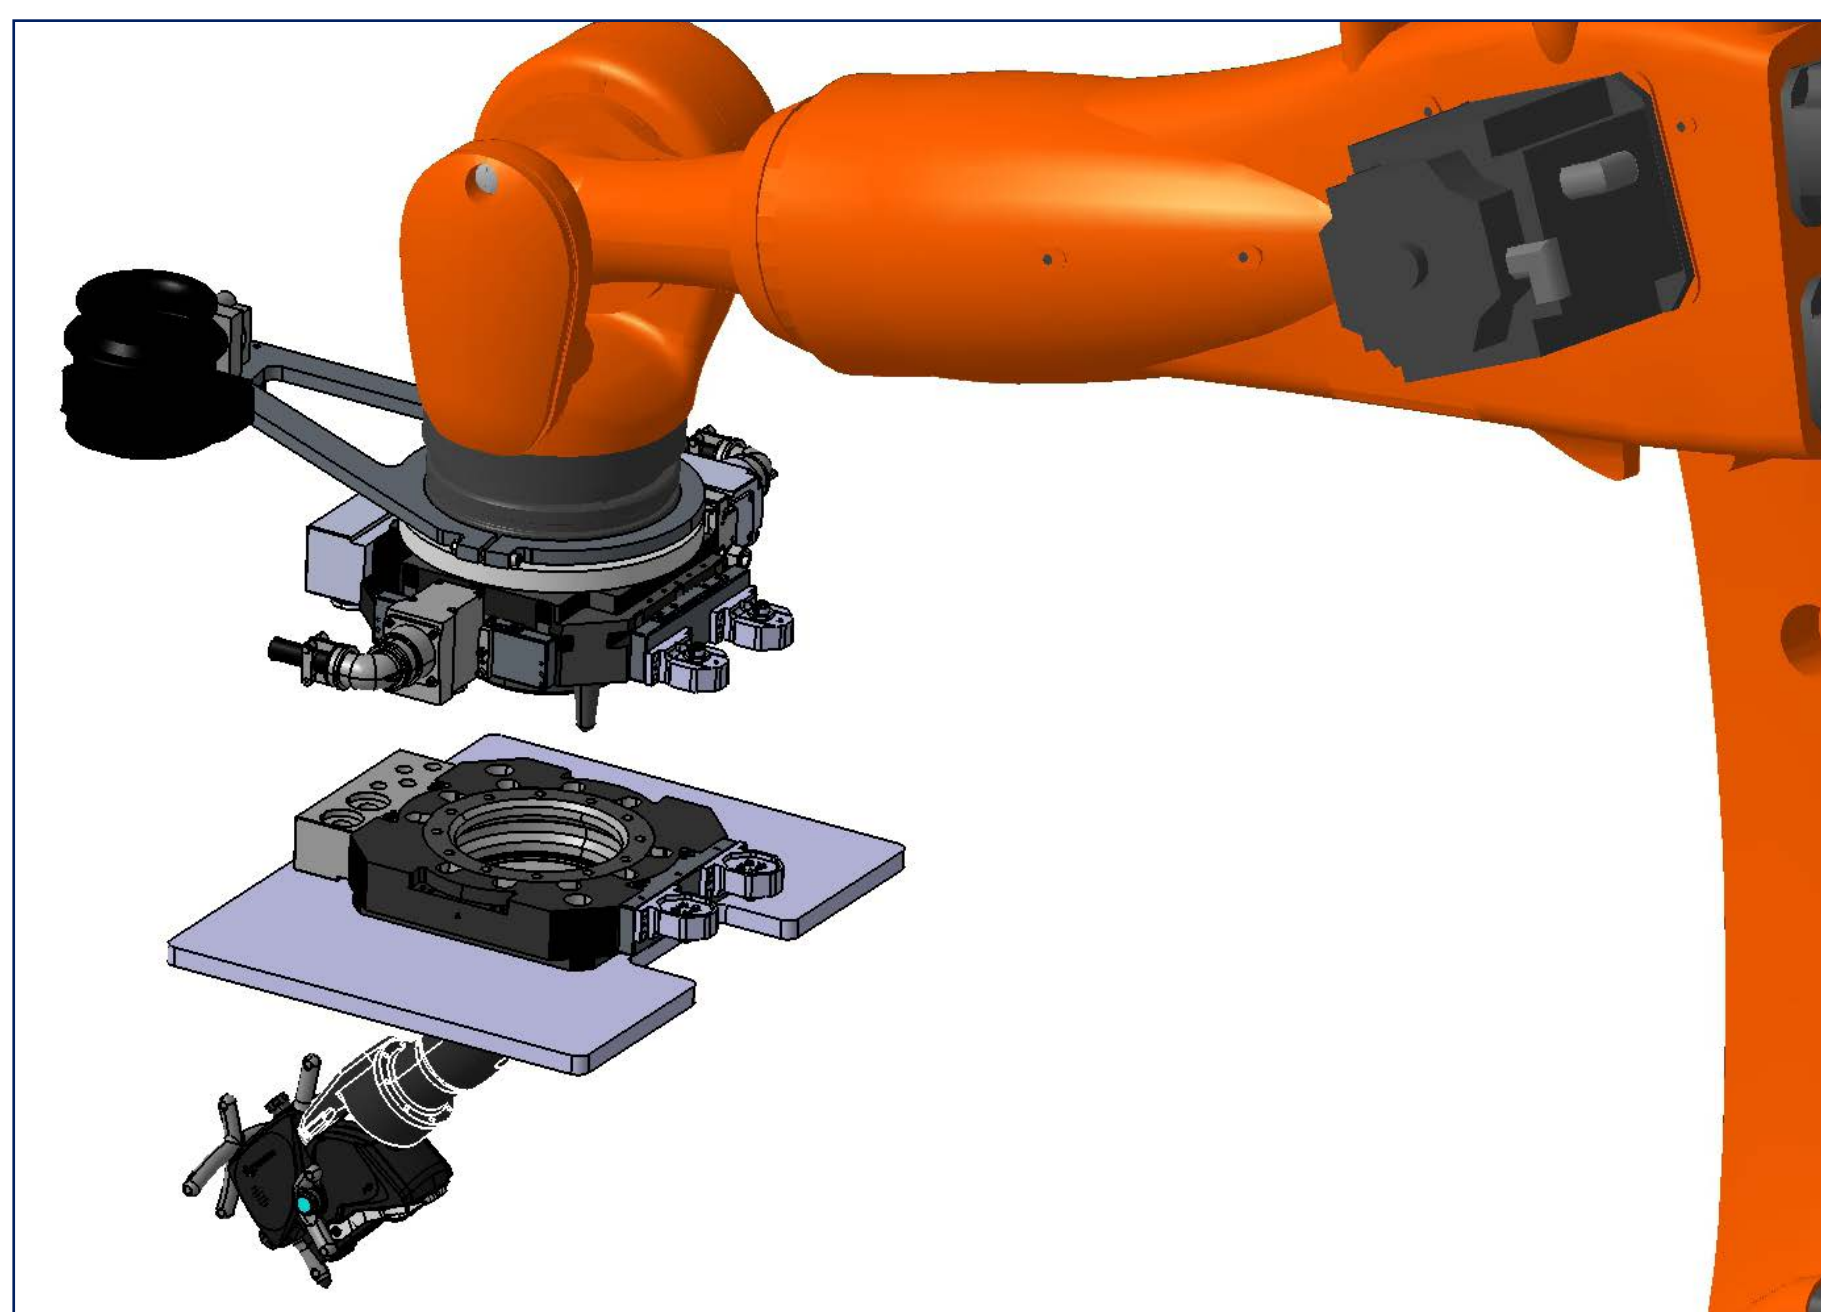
Quick-change end effector of the robot with the scanner assembly.
